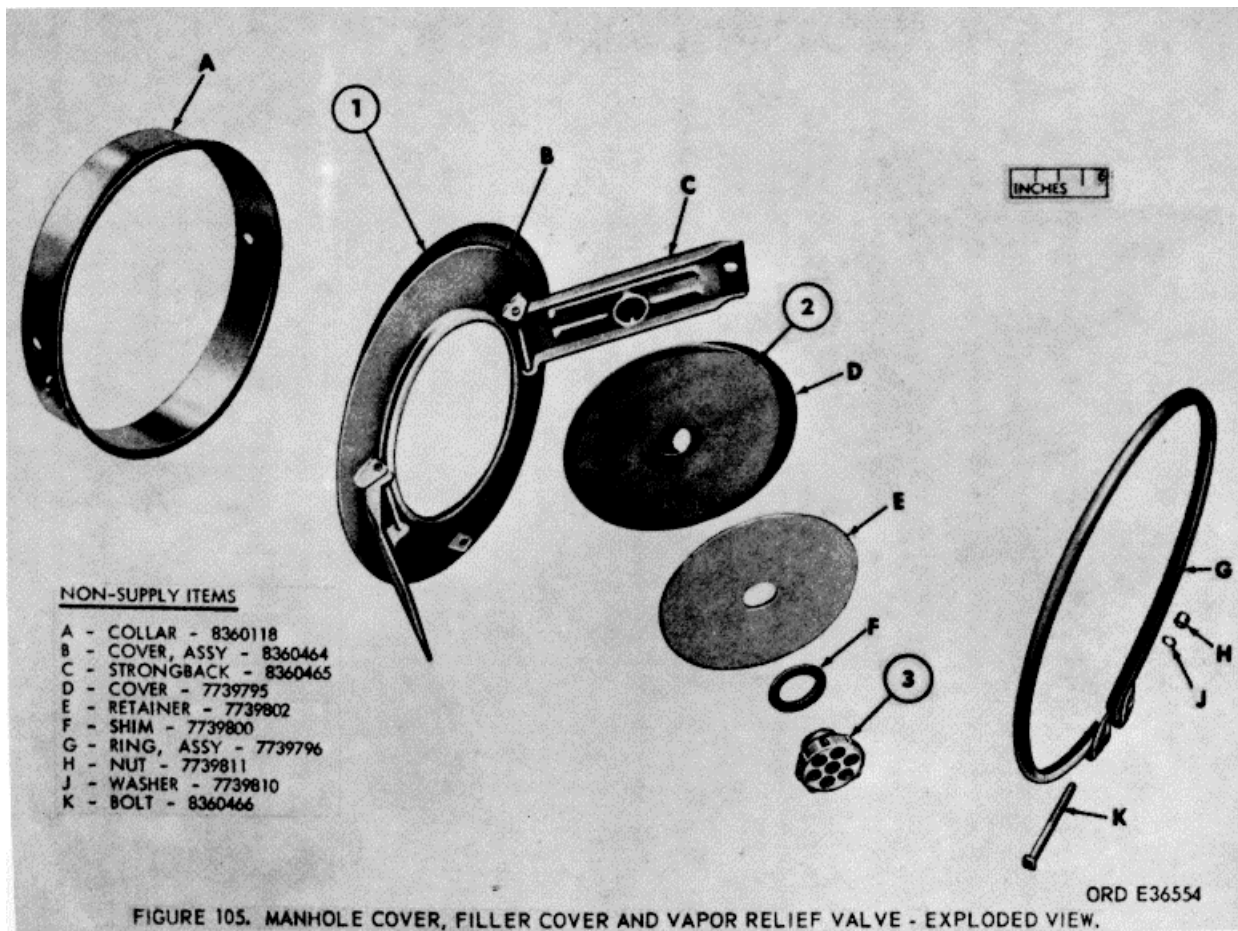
MANHOLE COVER, FILLER COVER AND VAPOR RELIEF VALVE - EXPLODED VIEW.
